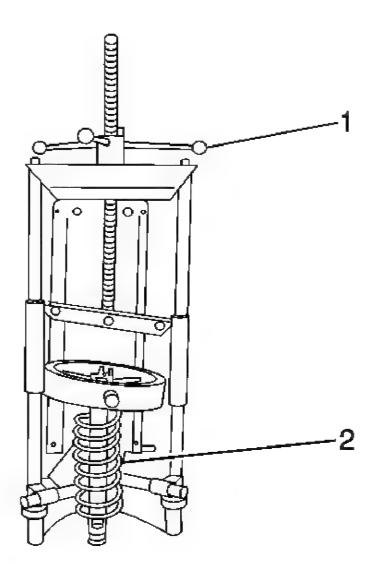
View Of Compressor Forcing Screw & Coil Spring Courtesy of GENERAL MOTORS CORP.
